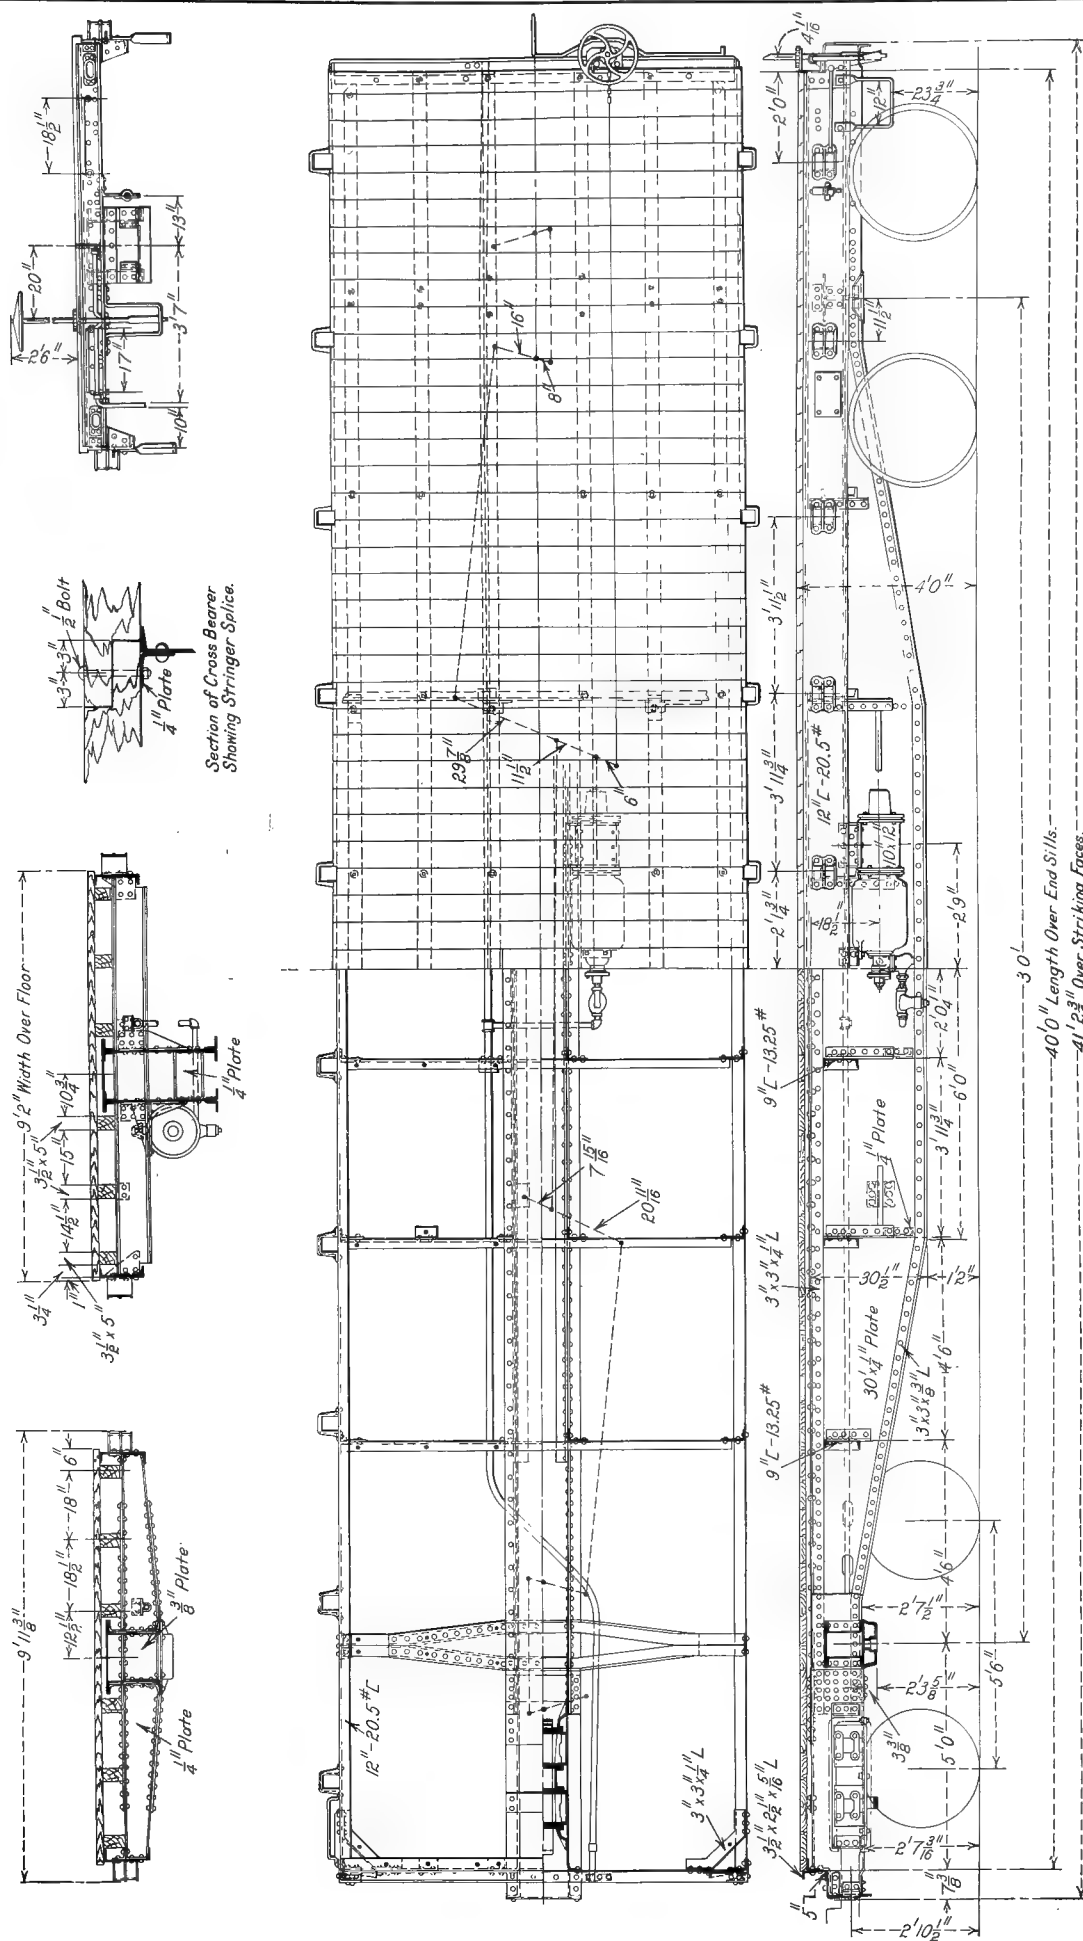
Akron, Canton & Youngstown Steel Frame 50-Ton Capacity Flat Car. Builder, American Car & Foundry Company.
